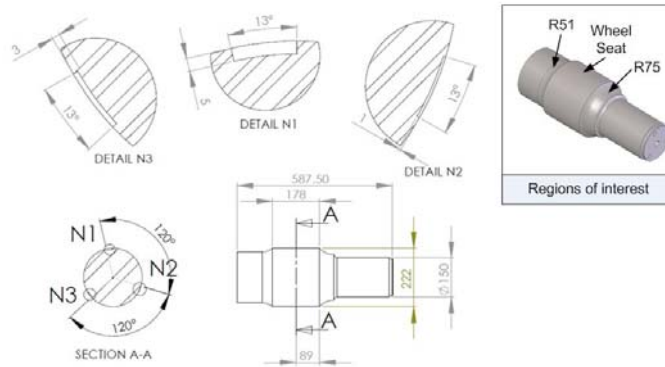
CAD drawing of test block 1 showing details of the machined EDM notches
